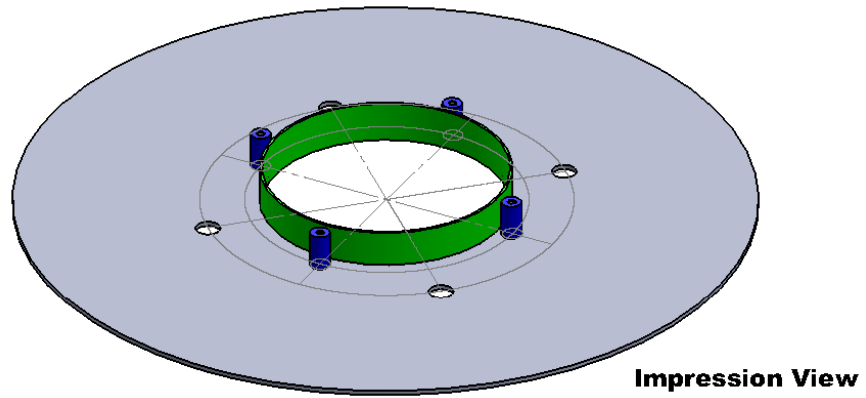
Impression view of the top component in SOLIDWORKS®.
